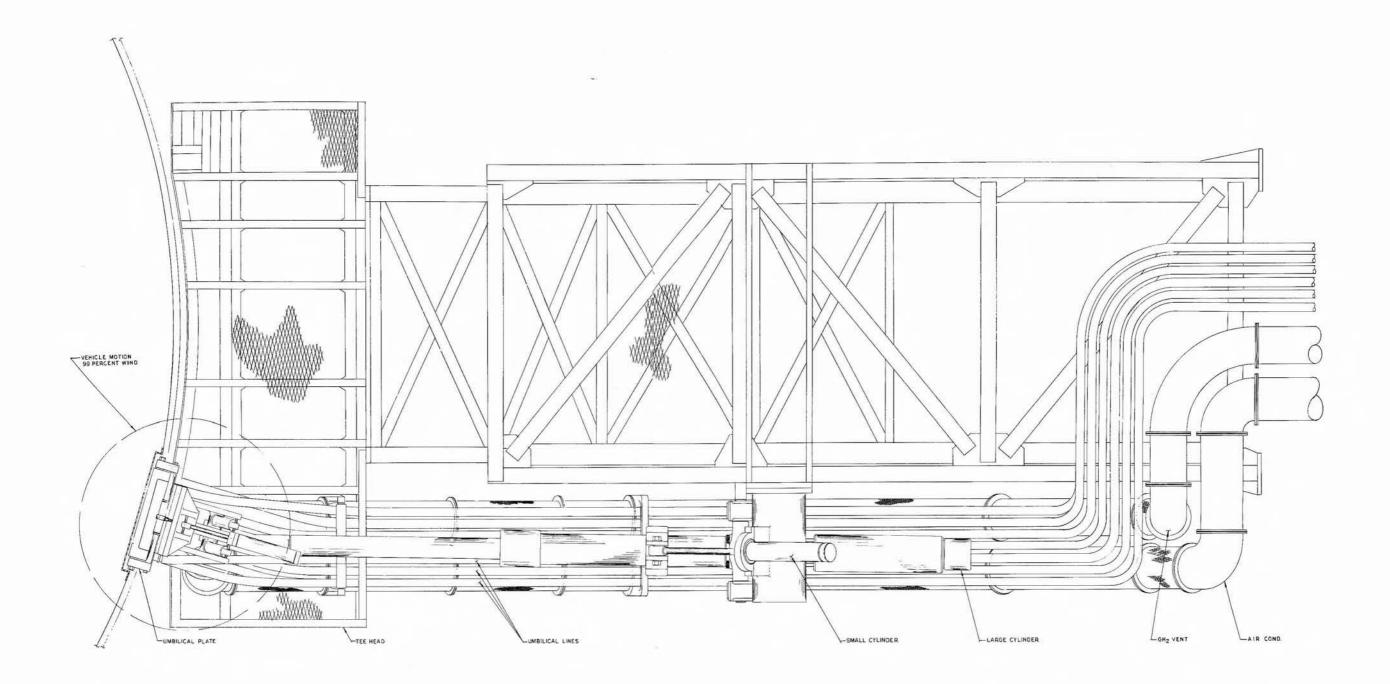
S-IVB FWD Withdrawal Mechanism (Sheet 3 of 3)
